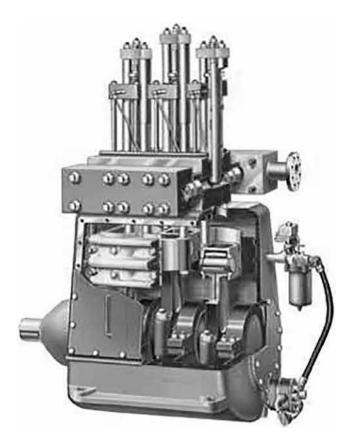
Cutaway view of a typical vertical pump. Courtesy of Ingersoll-Rand Company.
